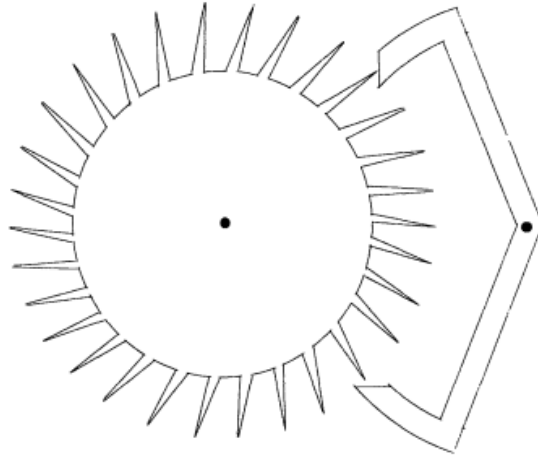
Escapement with all construction lines removed. (Hill F. A., 2008)
